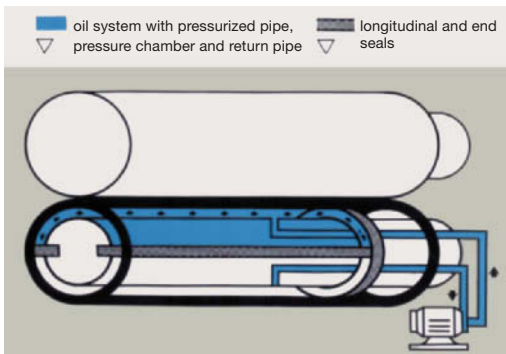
Finishing padder with a swimming roller mounted vertically below the conventional squeeze roller (Küstlers).
